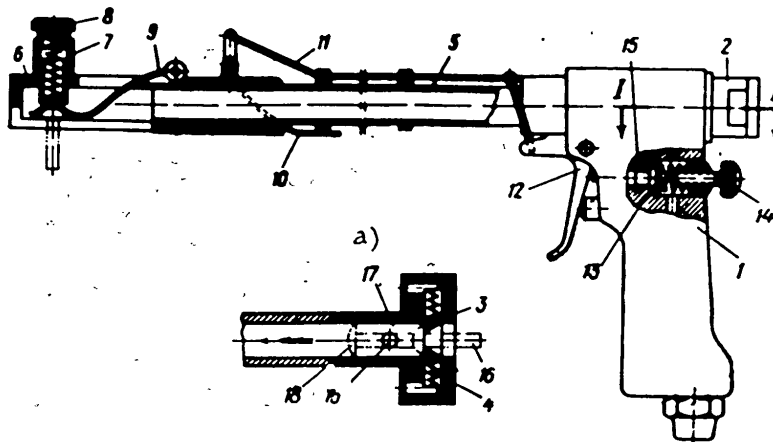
Pneumatic Device for Insertion of Rivets in Tubular Structures
